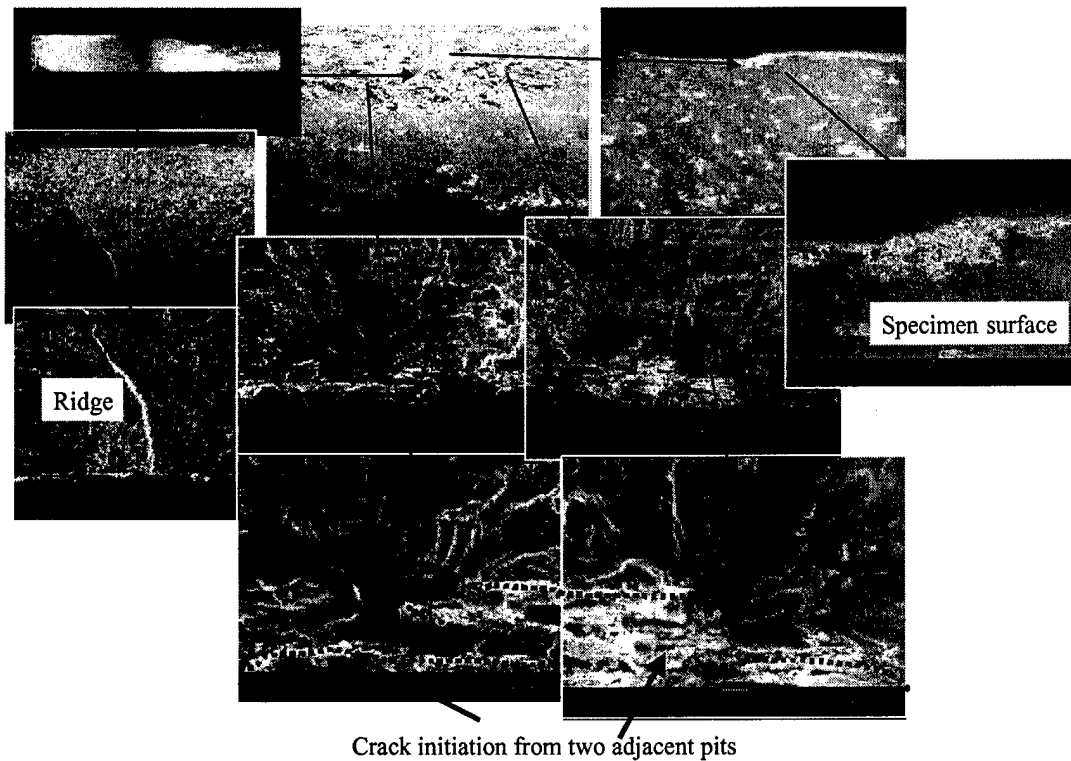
Fracture Surface of Specimen 51-3 Showing Cracks Nucleating From Adjacent Pits and Coalescing Into Single Crack
